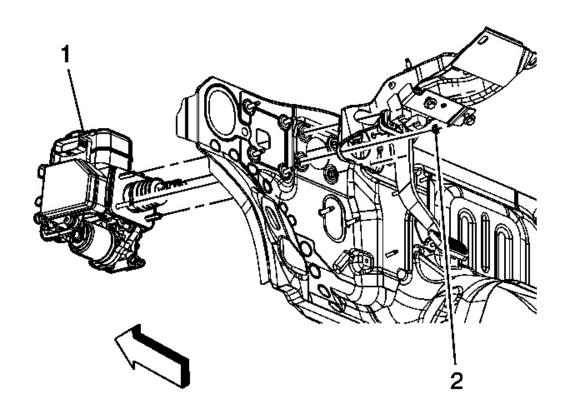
Master Cylinder Removal/Installation Courtesy of GENERAL MOTORS CORP.
